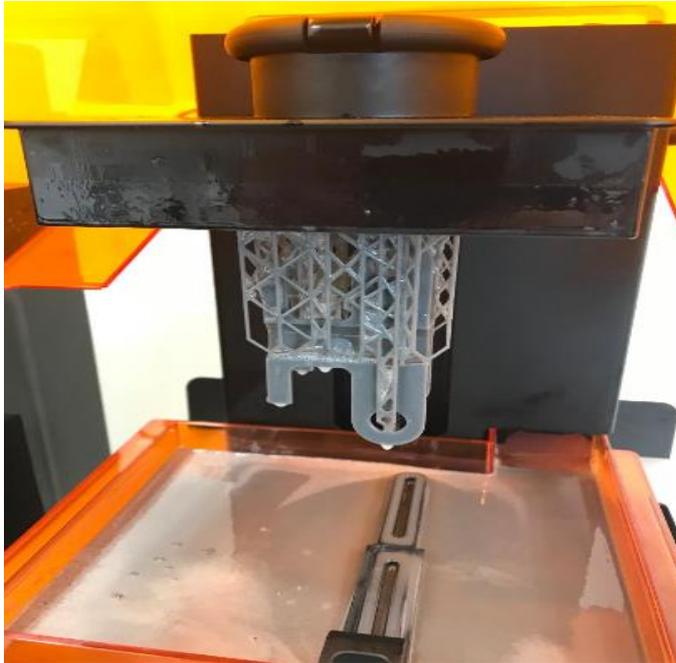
The cable fixing clamp with supports, printed on FormLab 3D printer
